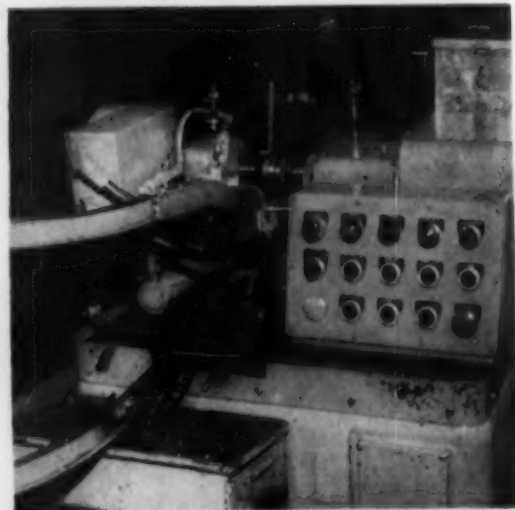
Electric "ear" on gear speeders segregates noisy or otherwise defective gears.
